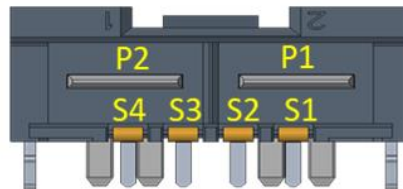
48VHPWR Auxiliary Power Connector Pinout, Header Side
